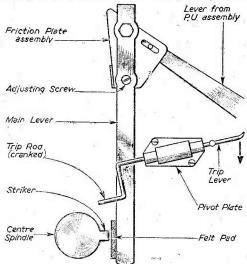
Auto-trip mechanism, as used by Garrard. Main lever moves by P.U. lever movement, via At ultimate (run-off) friction plate assembly. groove, lever is thrown into path of striker which Owing to the makes contact with the felt pad. shape of the end an upward and backward movement is imparted, causing rotation (partial) of the trip rod which is angled at its farther end so that eventual movement of the trip lever is in the direction of the arrow in diagram.
